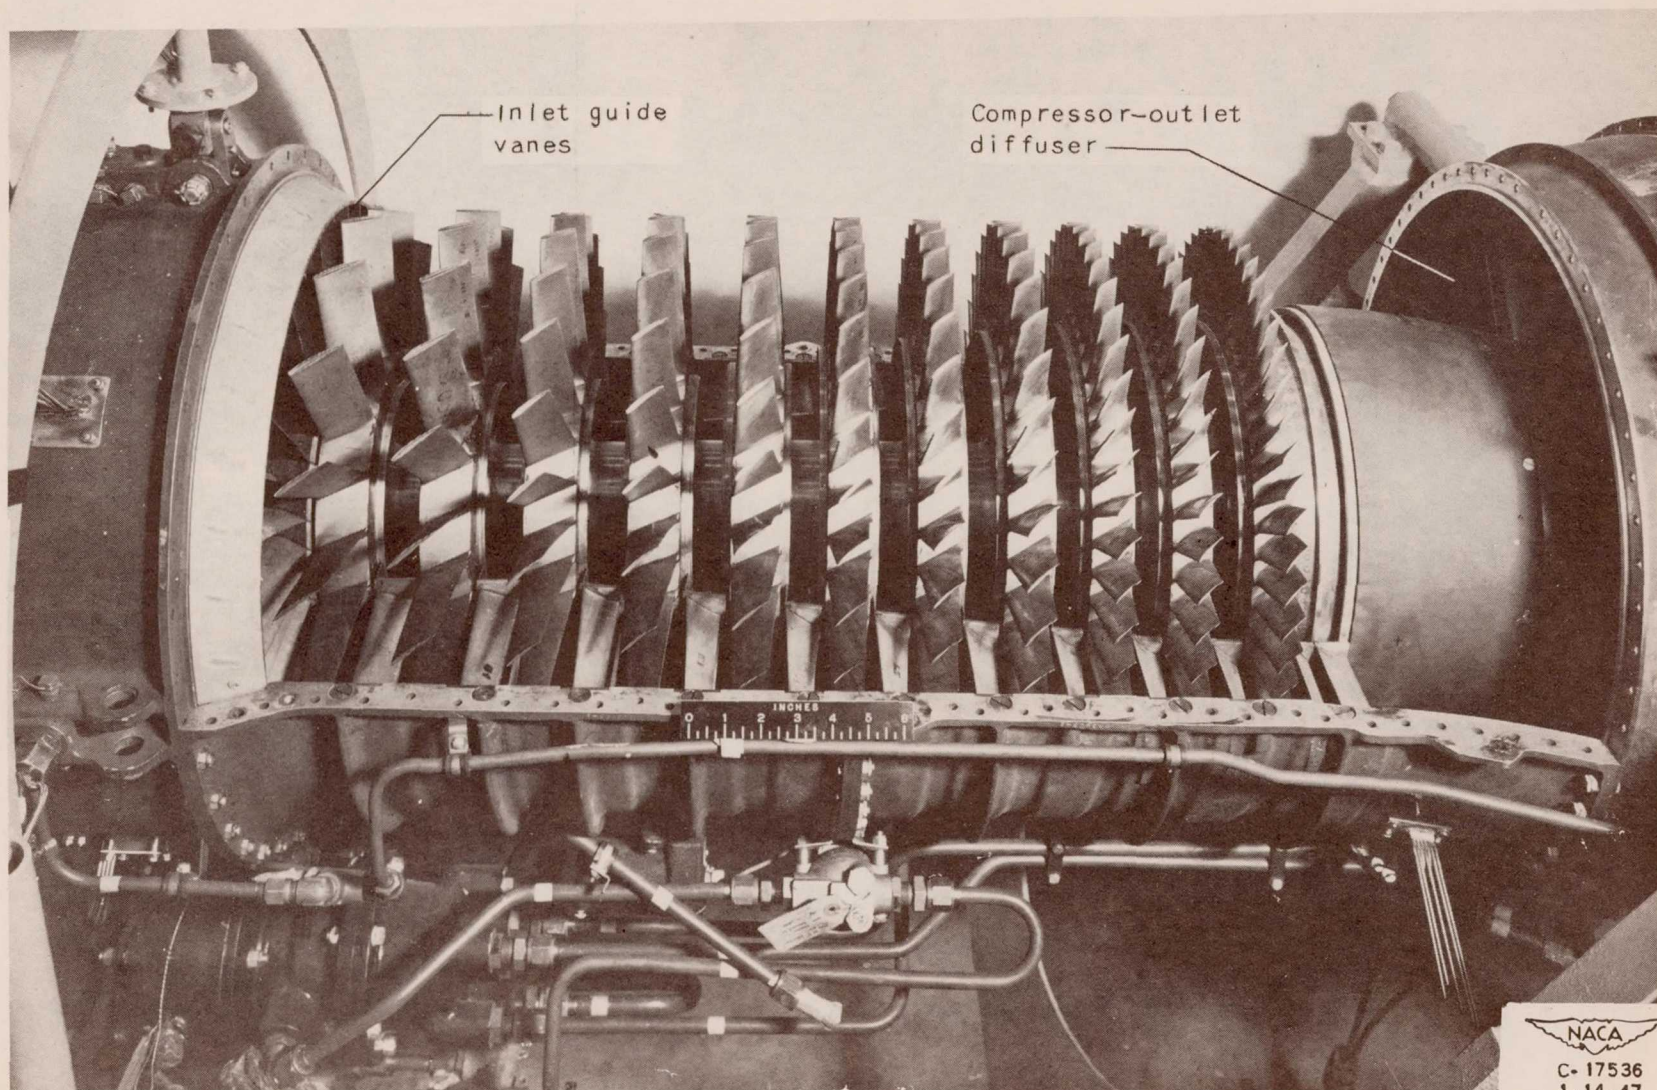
Compressor of X24C-4B turbojet engine with top half of casing removed.
